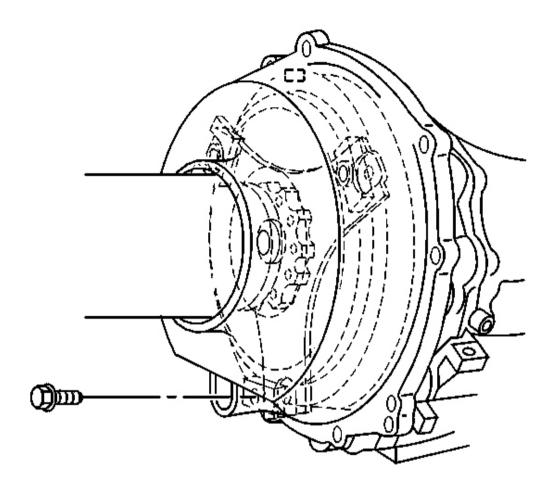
Flexplate & Torque Converter Bolt Courtesy of GENERAL MOTORS CORP.
